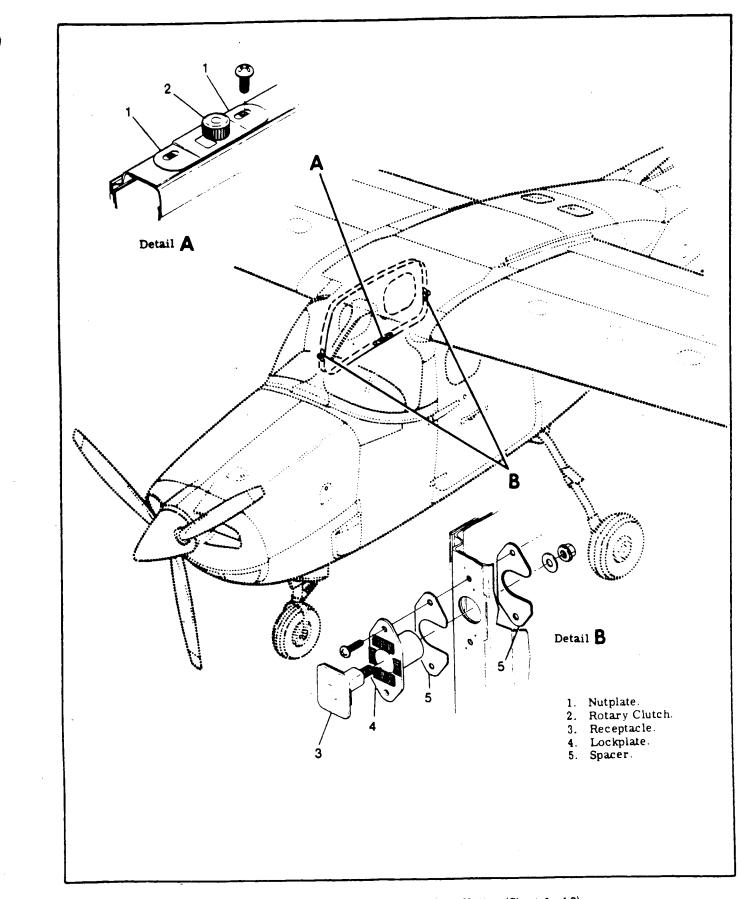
Emergency Exit Door Installation (Sheet 1 of 2).
